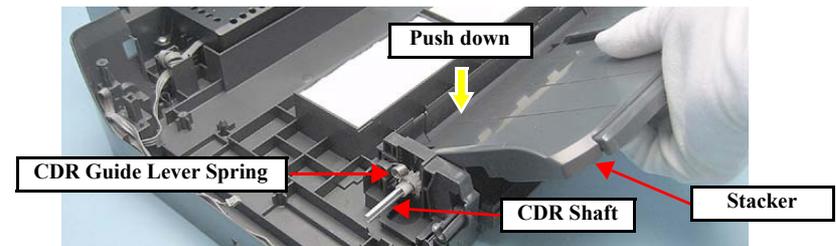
Removing the CDR Guide Lever Spring (1)
